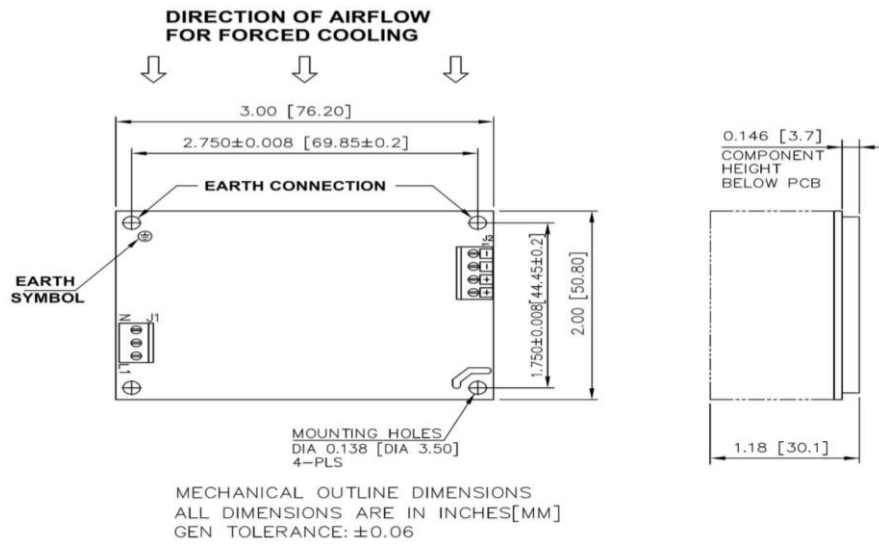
Mechanical Drawing - Screw Terminal (Option 1)
